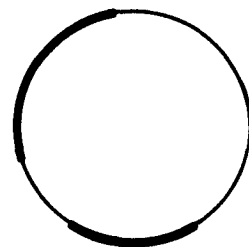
Teardown Wear Patterns (Rear View); Tenth-Stage High-Pressure Compressor Outer and Inner Air Seals. (J23976-10)
